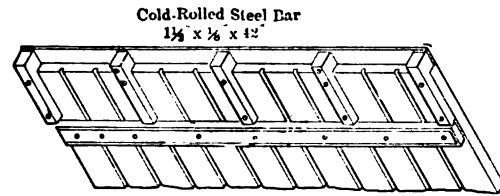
Applying Maple Brackets for Securing Straightedge to Drawing Boards
